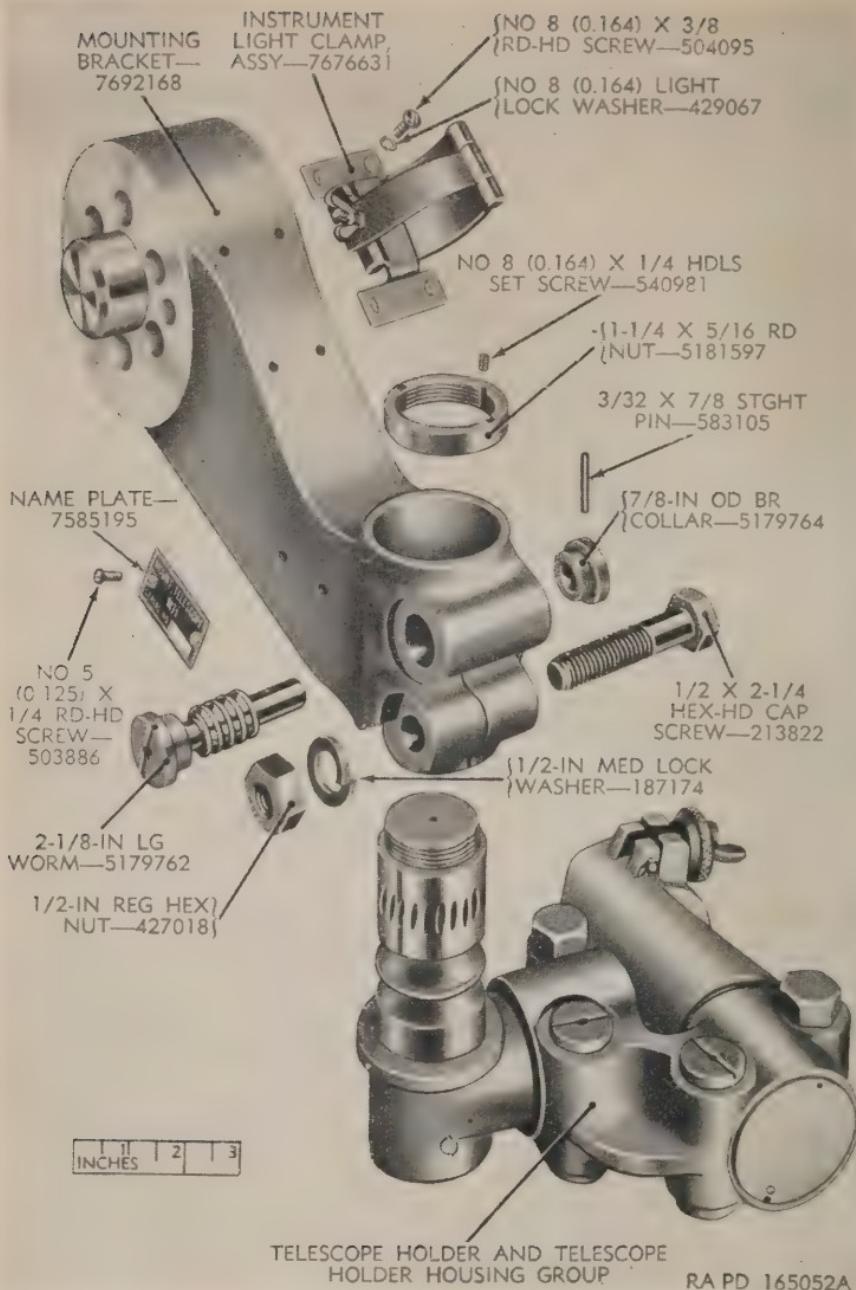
Telescope mount M71—removal of the major assemblies and related parts.
